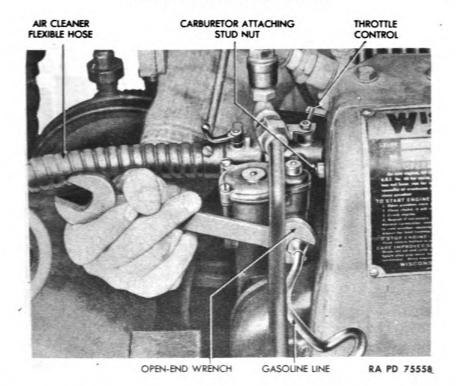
Removing Steam Generating Plant Engine Carburetor
